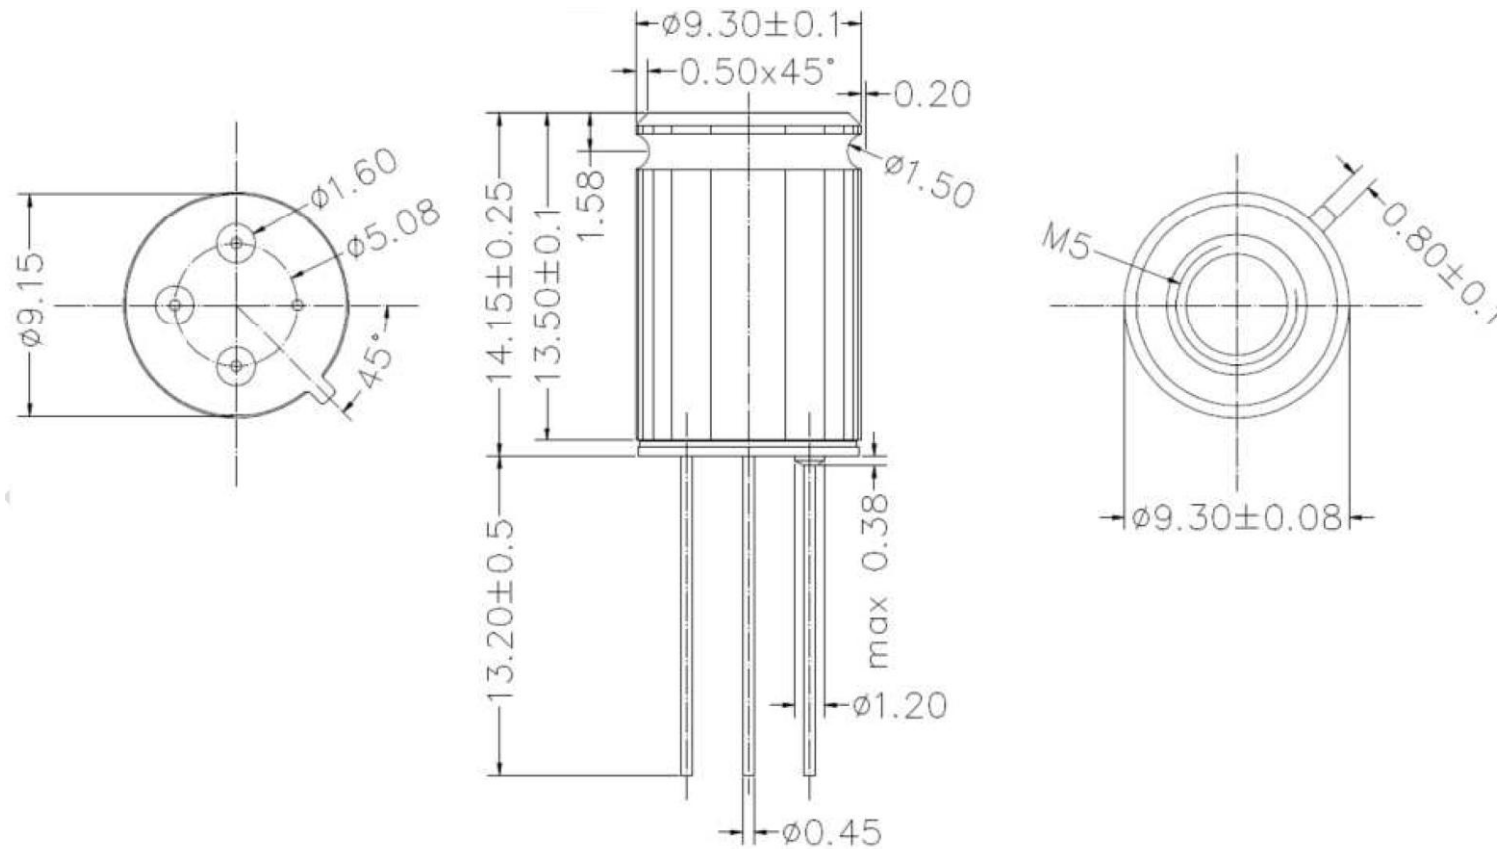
dimensional drawing of the HTPA16x4R1L5.5EA
